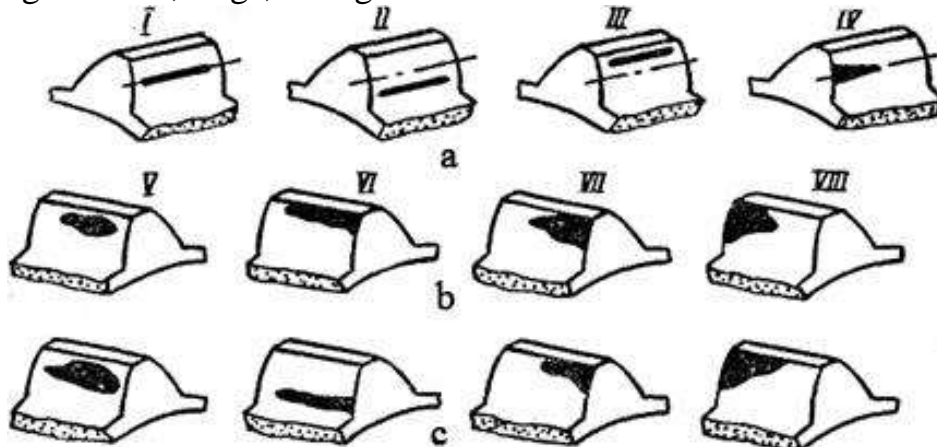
Check-out of contact accuracy «on paint» of gear wheels:
